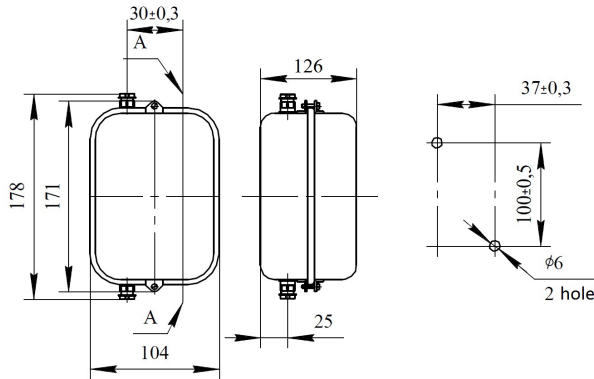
The overall and connecting dimensions of the sphere for BI04.43-1 fastening
